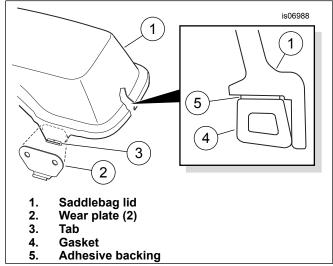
Assemble Wear Plates and Gasket to Saddlebag
